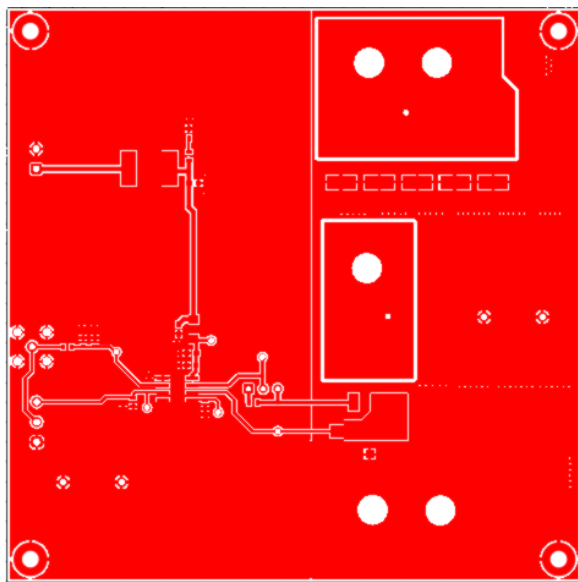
FAD1101 EVB PCB Internal Plane 1 Drawing
